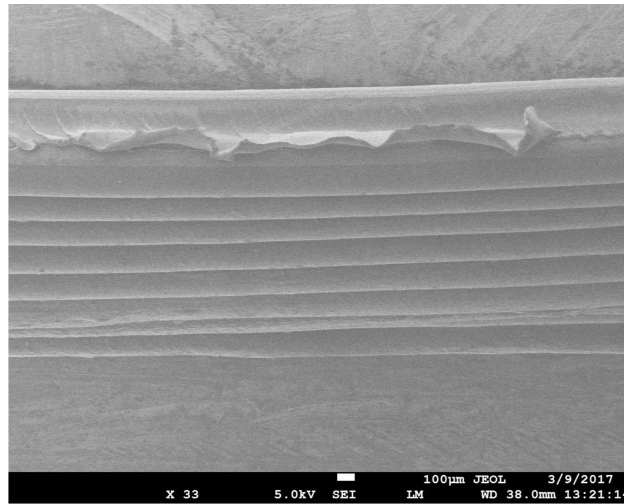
SEM image of tear test fracture surface for LIRF-welded, 3D-printed PLA tear test samples (necking and crazing are clearly visible).
